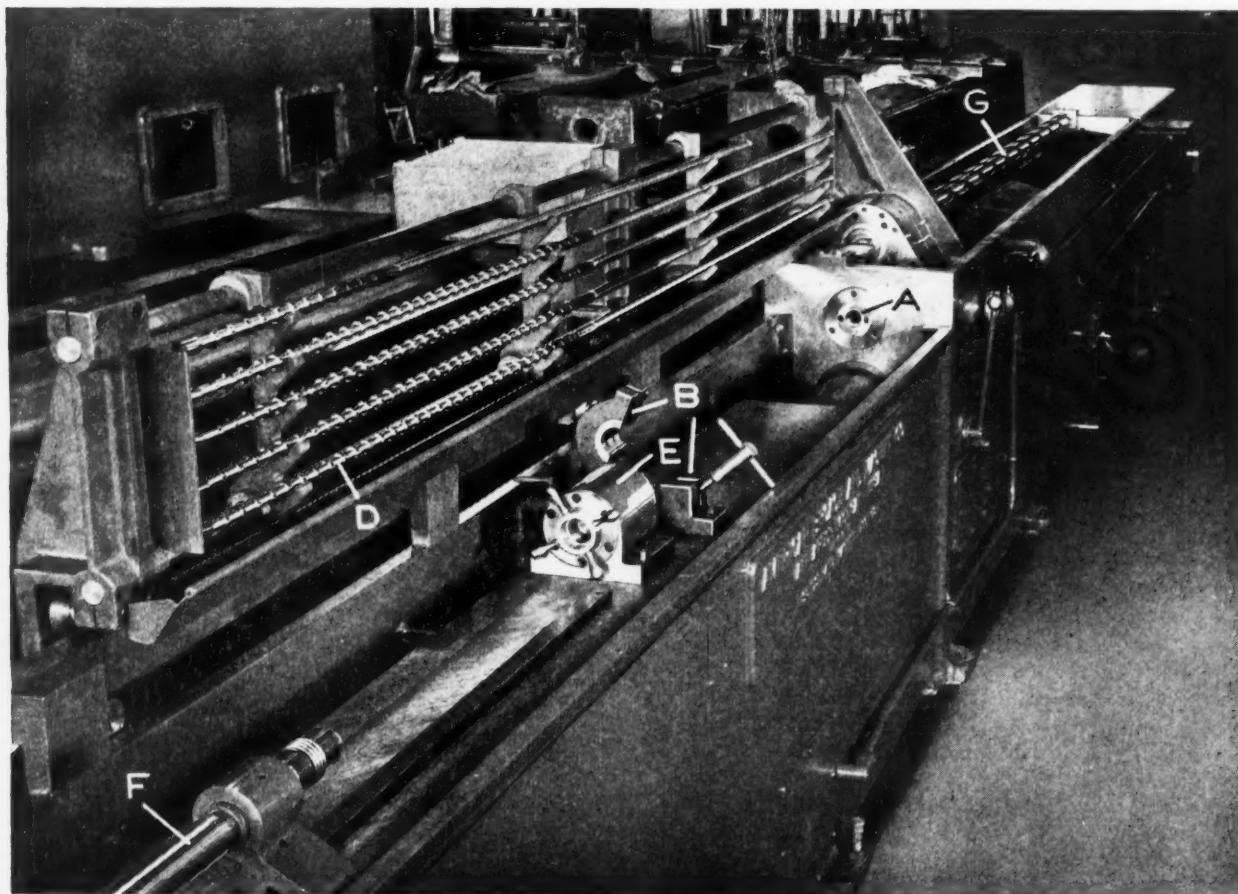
Hydraulic Pull-broach Rifling Machine Developed by American Broach & Machine Co. for Rifling 20-millimeter Cannon
